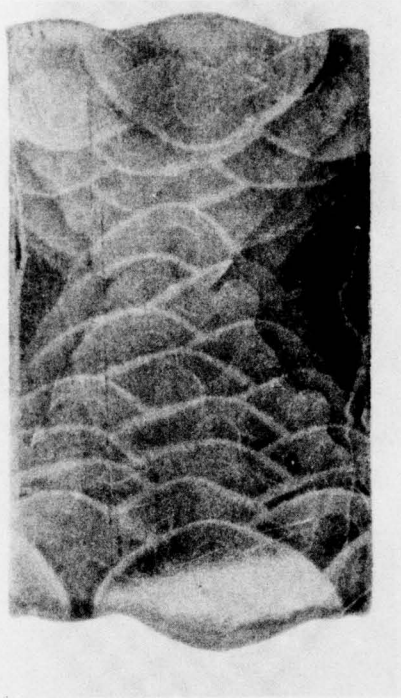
Macroetched full-thickness (1.5") section through Weld D, showing size of weld beads.
